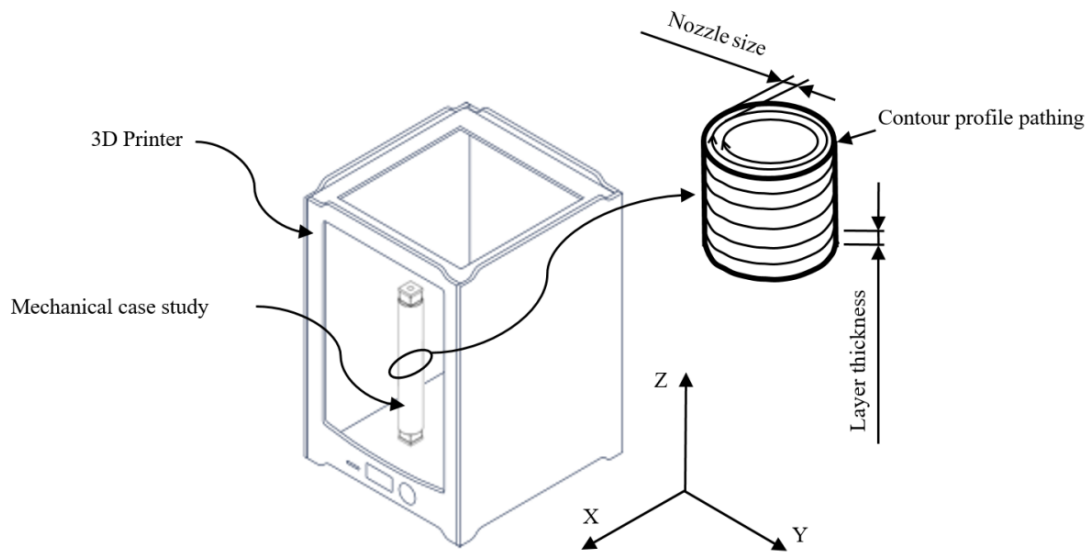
Configuration of the 3D printing process of the mechanical element under study.
